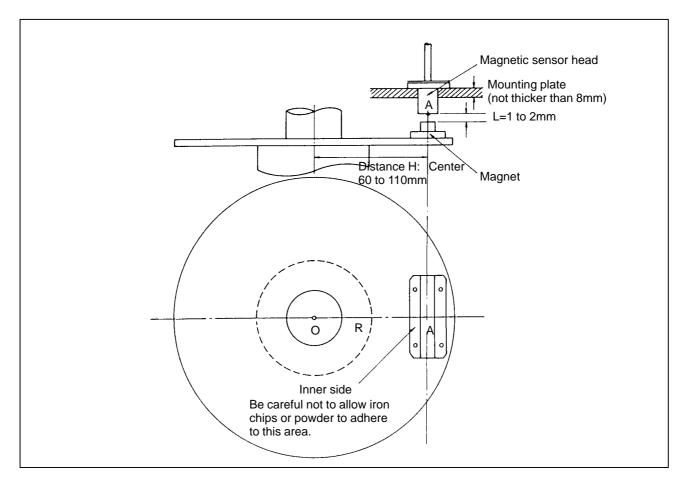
(c) Example of Mounting a Magnetic Sensor (3) (Mounting a Magnetic Sensor on a Disk)
